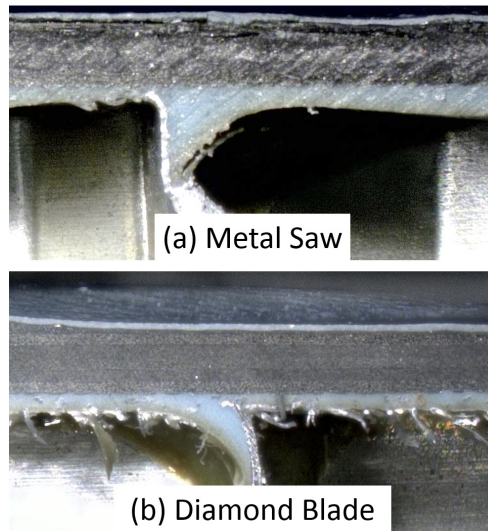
Rough cut (a) using a metal saw and (b) clean section using diamond cut-off wheel observed under microscope.
